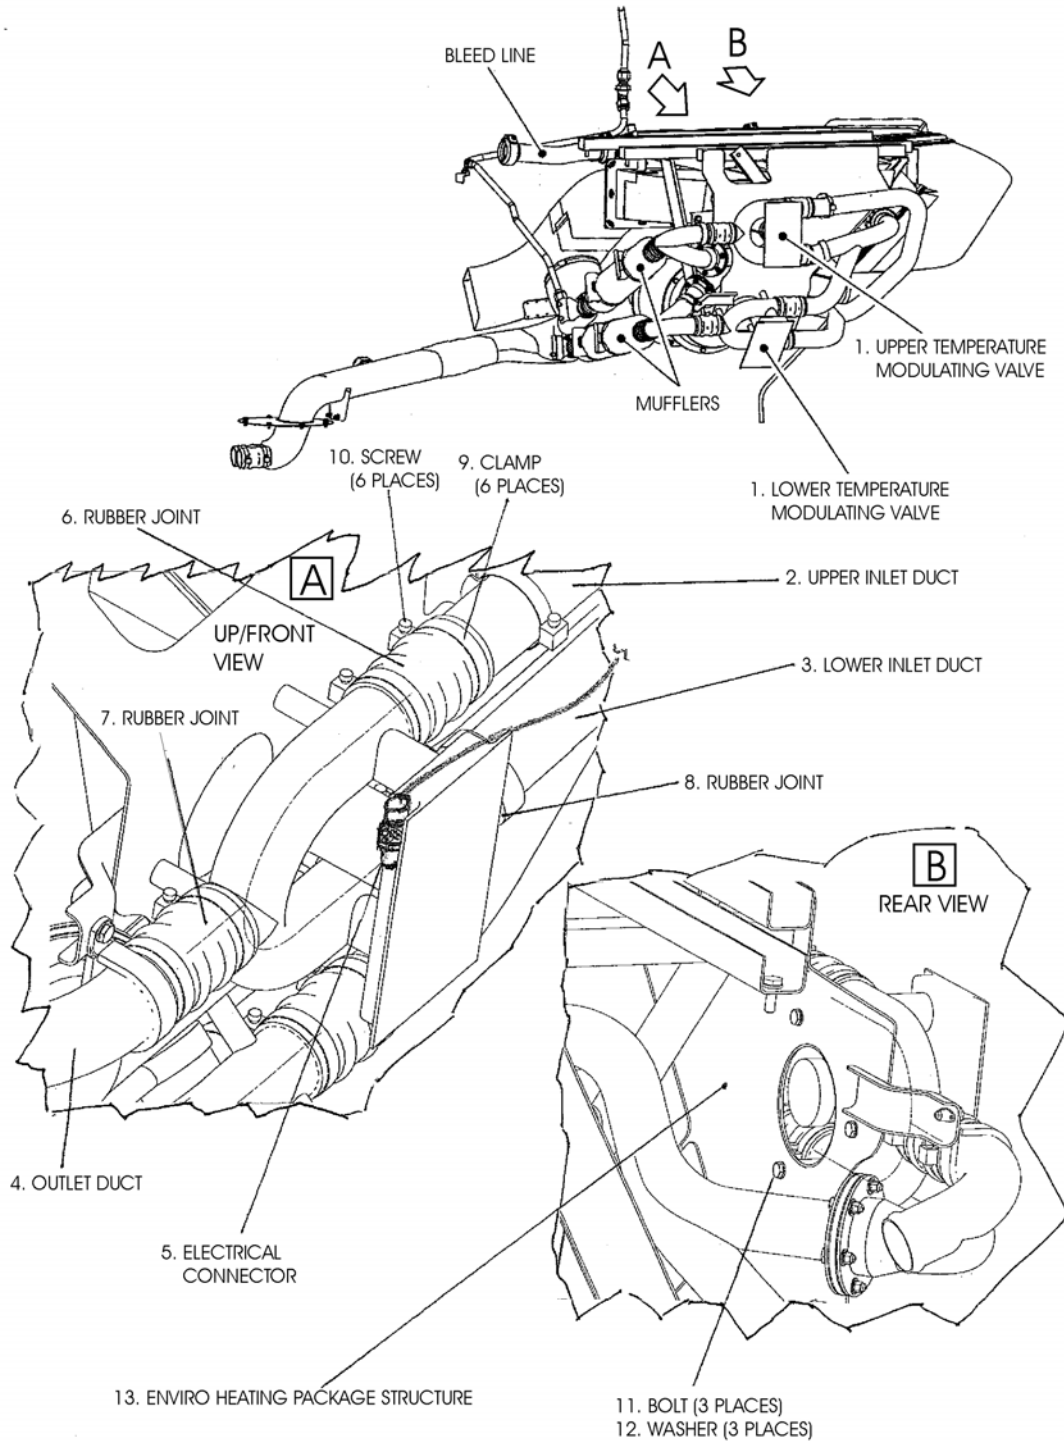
Temperature Modulating Valve - Removal / Installation
